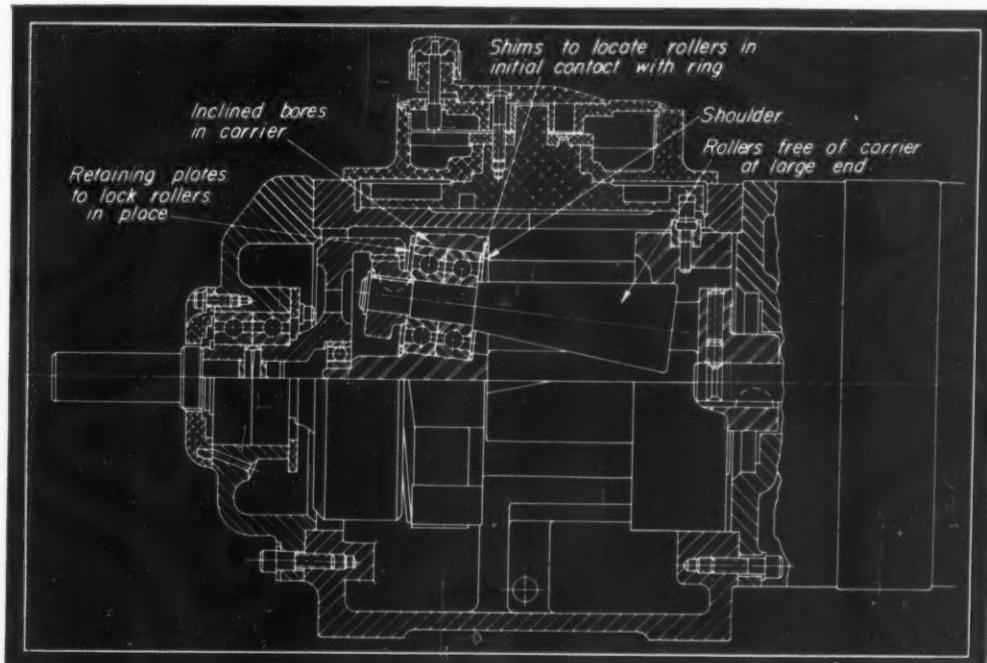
In final design rollers are free at their large end. Bearings at small end are locked in position at assembly, after rollers have been brought into initial contact with ring by shims inserted in carrier
